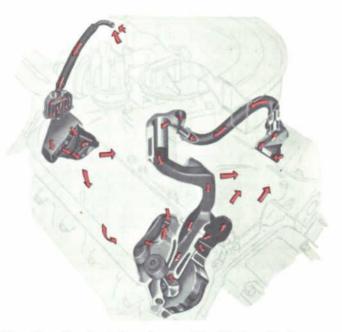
Typical Crankcase Ventilation System — V-8 Engine
